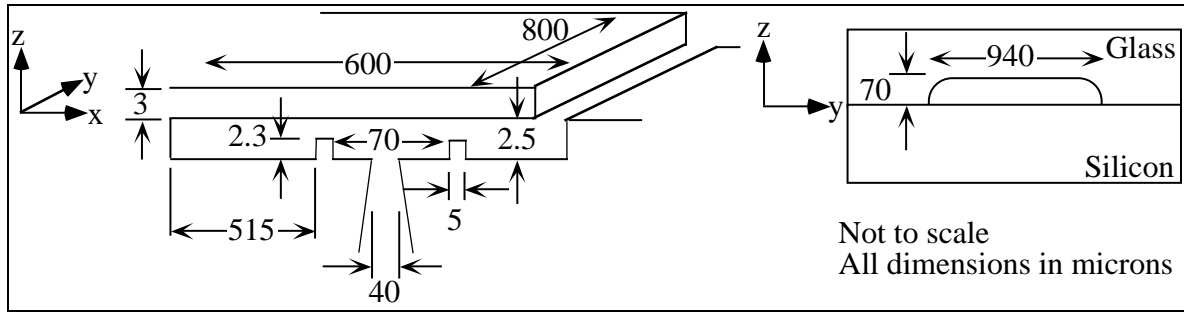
Dimensions of the cantilever-plate flapper valve and glass channel.
